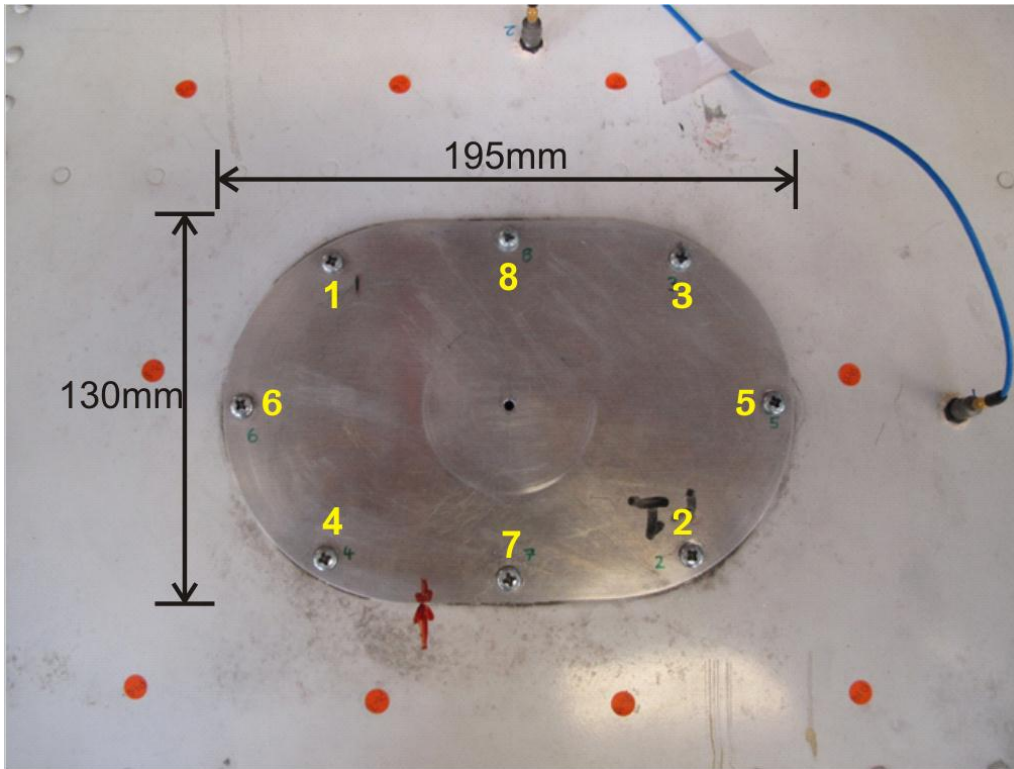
Inspection panel P1, with extremal dimensions and attachment sequence
